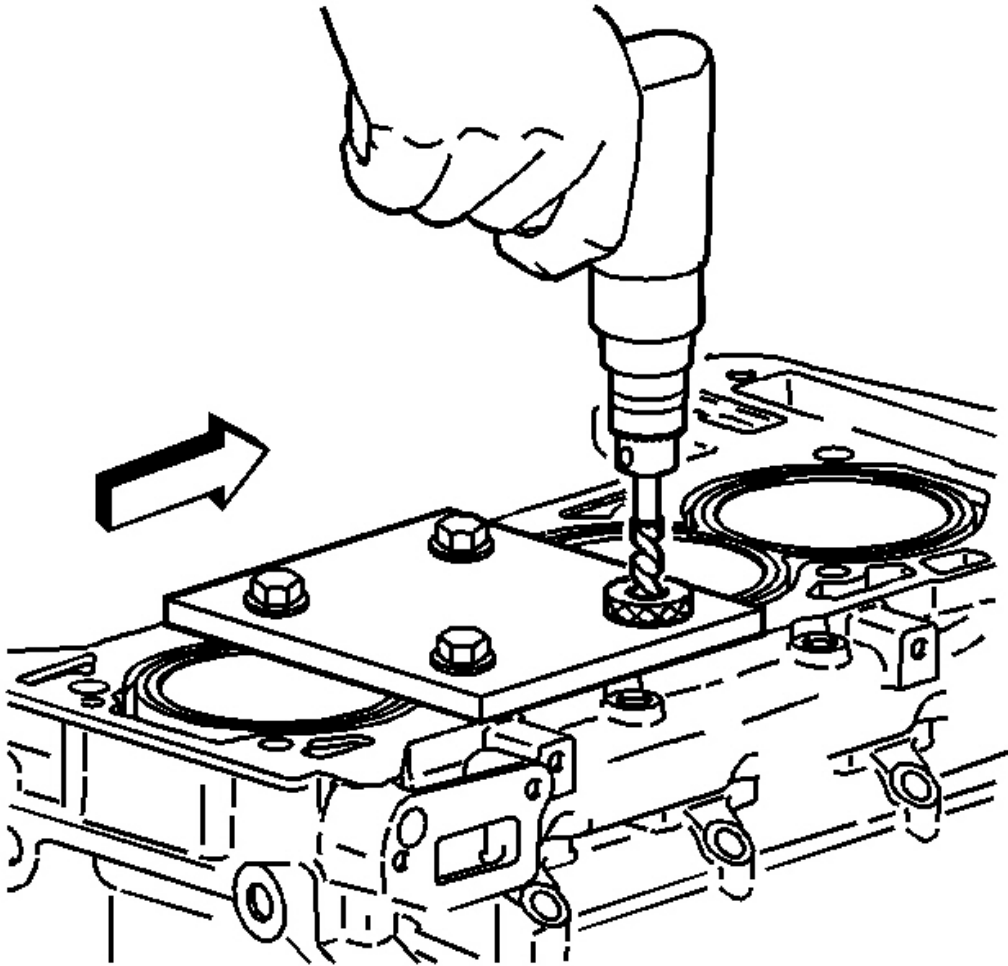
Drilling Out The Threads Of The Damaged Hole
